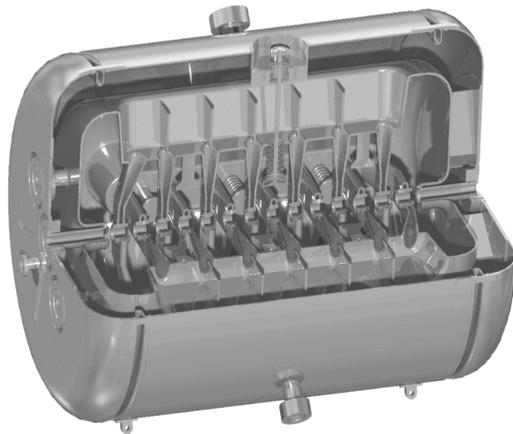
Sectional drawing of the 15-gap demonstrator CH-cavity [19].
